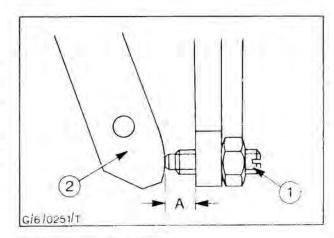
Adjust low idle setting 1. Idle adjustment screw
